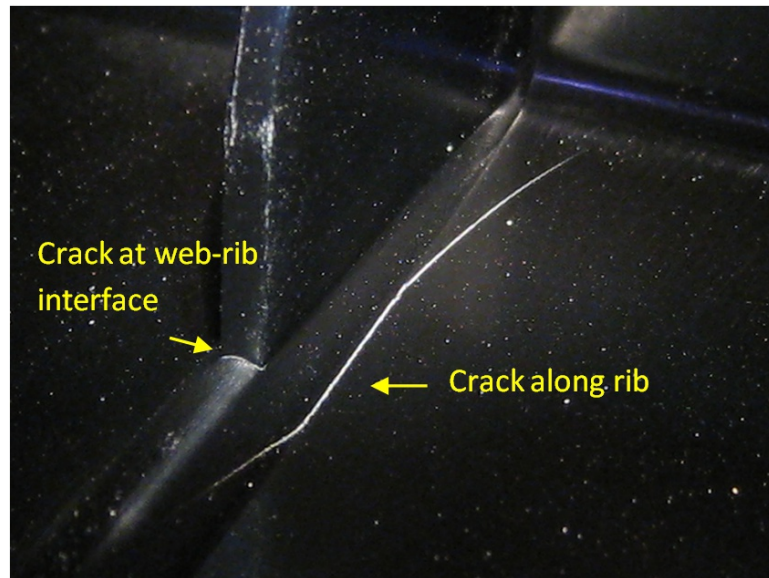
Crack at Rib 3 in 1.4 bar (20 psi) old containment tested manifold cover demonstrating a crack along the rib and a crack at the web-rib interface.
